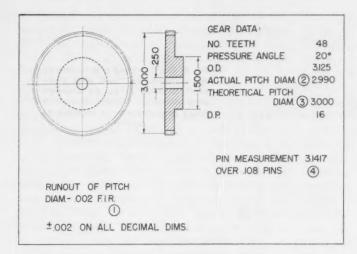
A confusion of nomenclature, absence of tolerances on essential dimensions, and errors in calculation put this drawing in the double-talk class.
